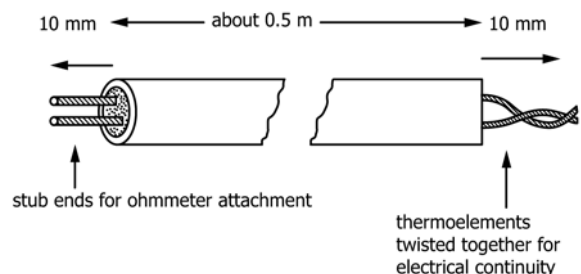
Specimen of Sheathed Thermocouple Cable Prepared for Tension Testing
